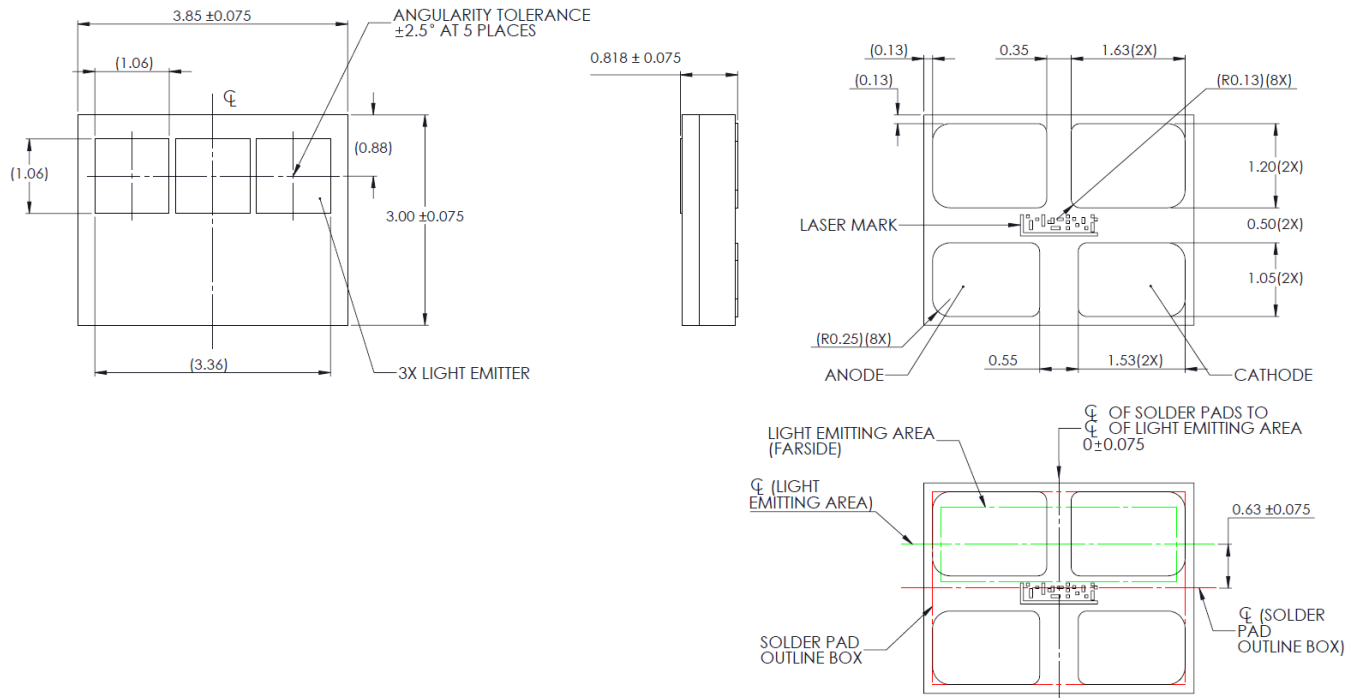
Mechanical Dimensions for LUXEON Altilon SMD 1x3
